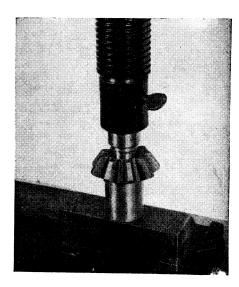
Pressing bushing into differential pinion. Use adapter with correct size offset to fit bushing
